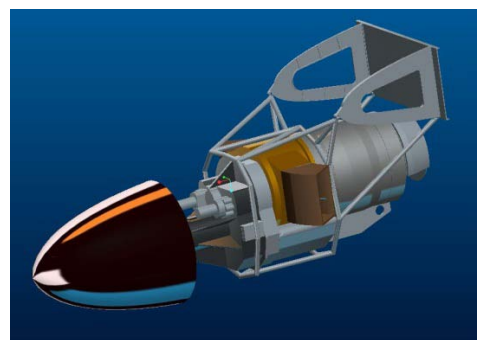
Final assembly of engine mount, turboprop engine and construction of a wing
